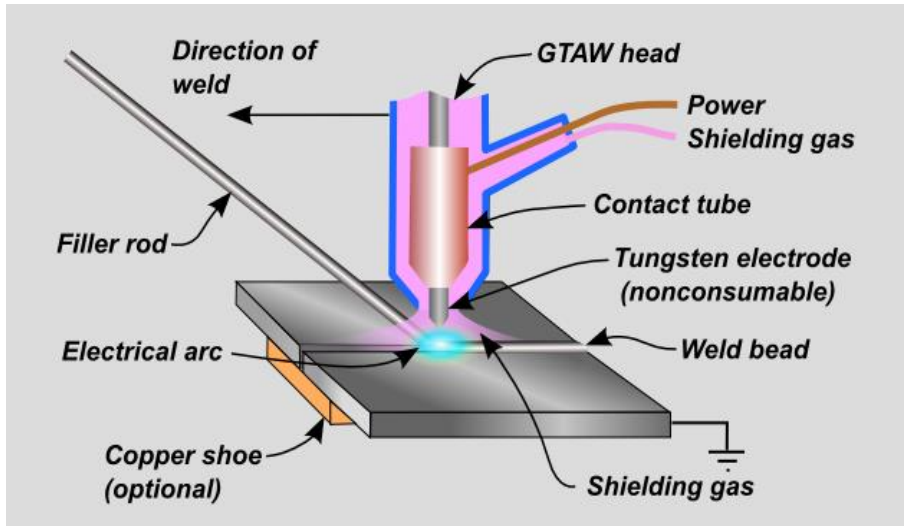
Gas tungsten arc welding operation [<http://www.burnsstainless.com>]
